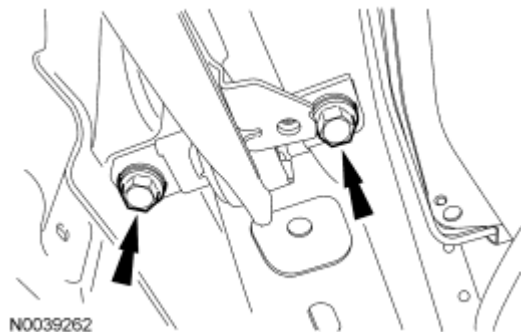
Locating Trailing Links-To-Vehicle Body Bolts
